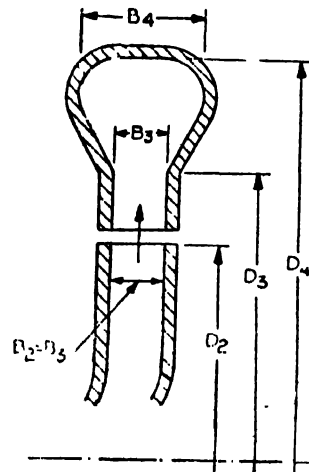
Section through Centrifugal Pump Impeller with Vortex Chamber and Volute Casing
